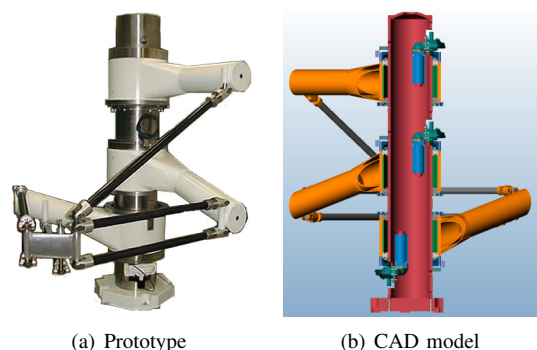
(a) The 2 m tall SCARA-Tau prototype. (b) A cutaway view of the CAD model of the prototype.
